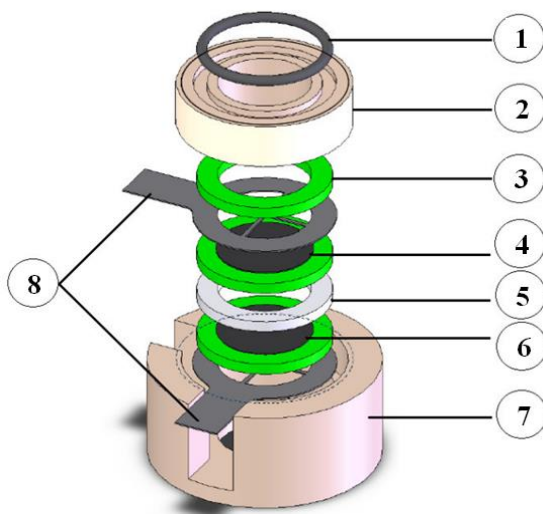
Electrode assembly holder: 1) O-ring, 2) holder top, 3) gasket, 4) counter electrode, 5) separator, 6) working electrode, 7) holder base, 8) current collectors [121]
